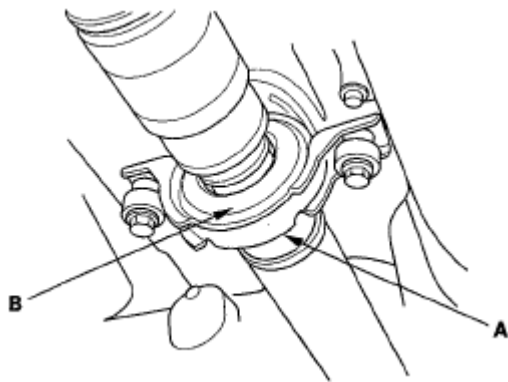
Identifying Center Support Bearing And Rubber Portion Mount
